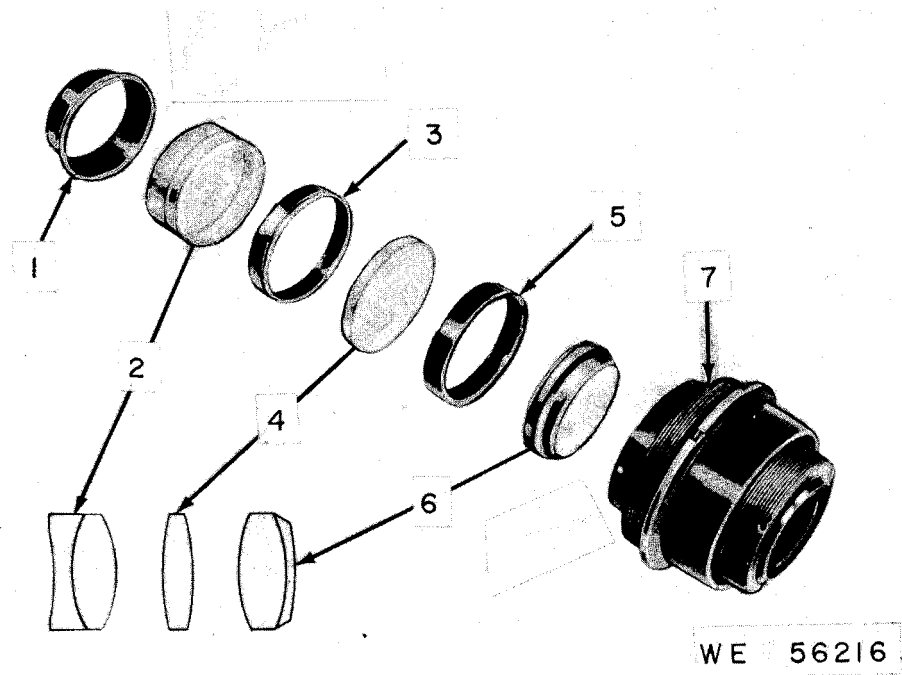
Left eyepiece assembly 8215542-partial exploded view.
